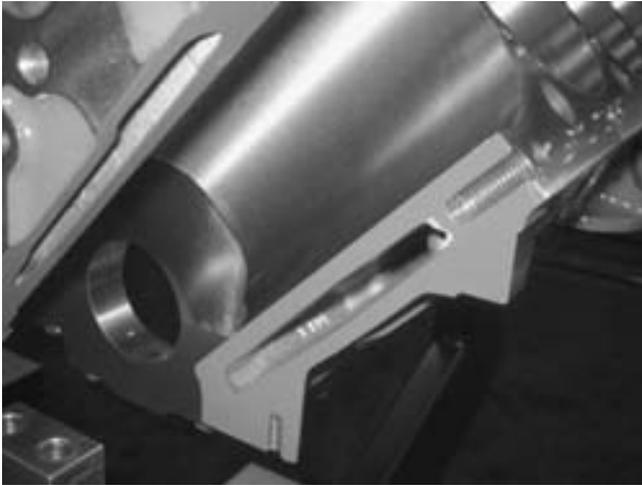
Notice on this cutaway engine block that some of the head bolt holes do not extend too far into the block and dead end. Debris can accumulate at the bottom of these holes and it must be cleaned out before final assembly.
